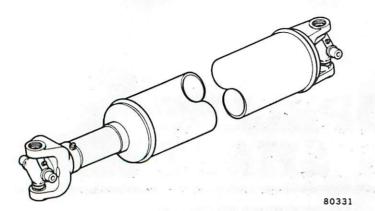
E-3 Rear Propeller Shaft Assembly— Cherokee, Wagoneer and Truck Models
